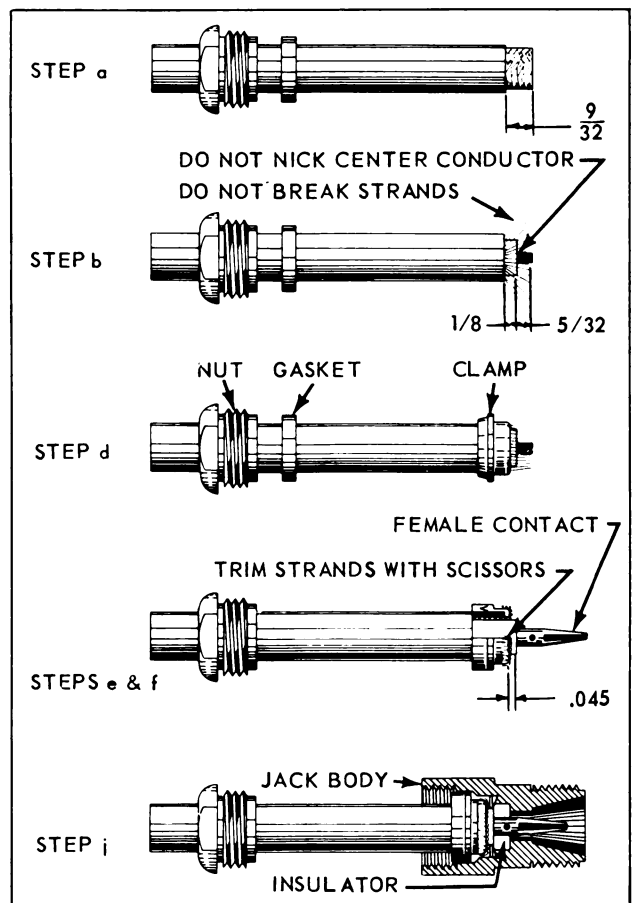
Attaching Improved N Connectors to Coaxial Cable
